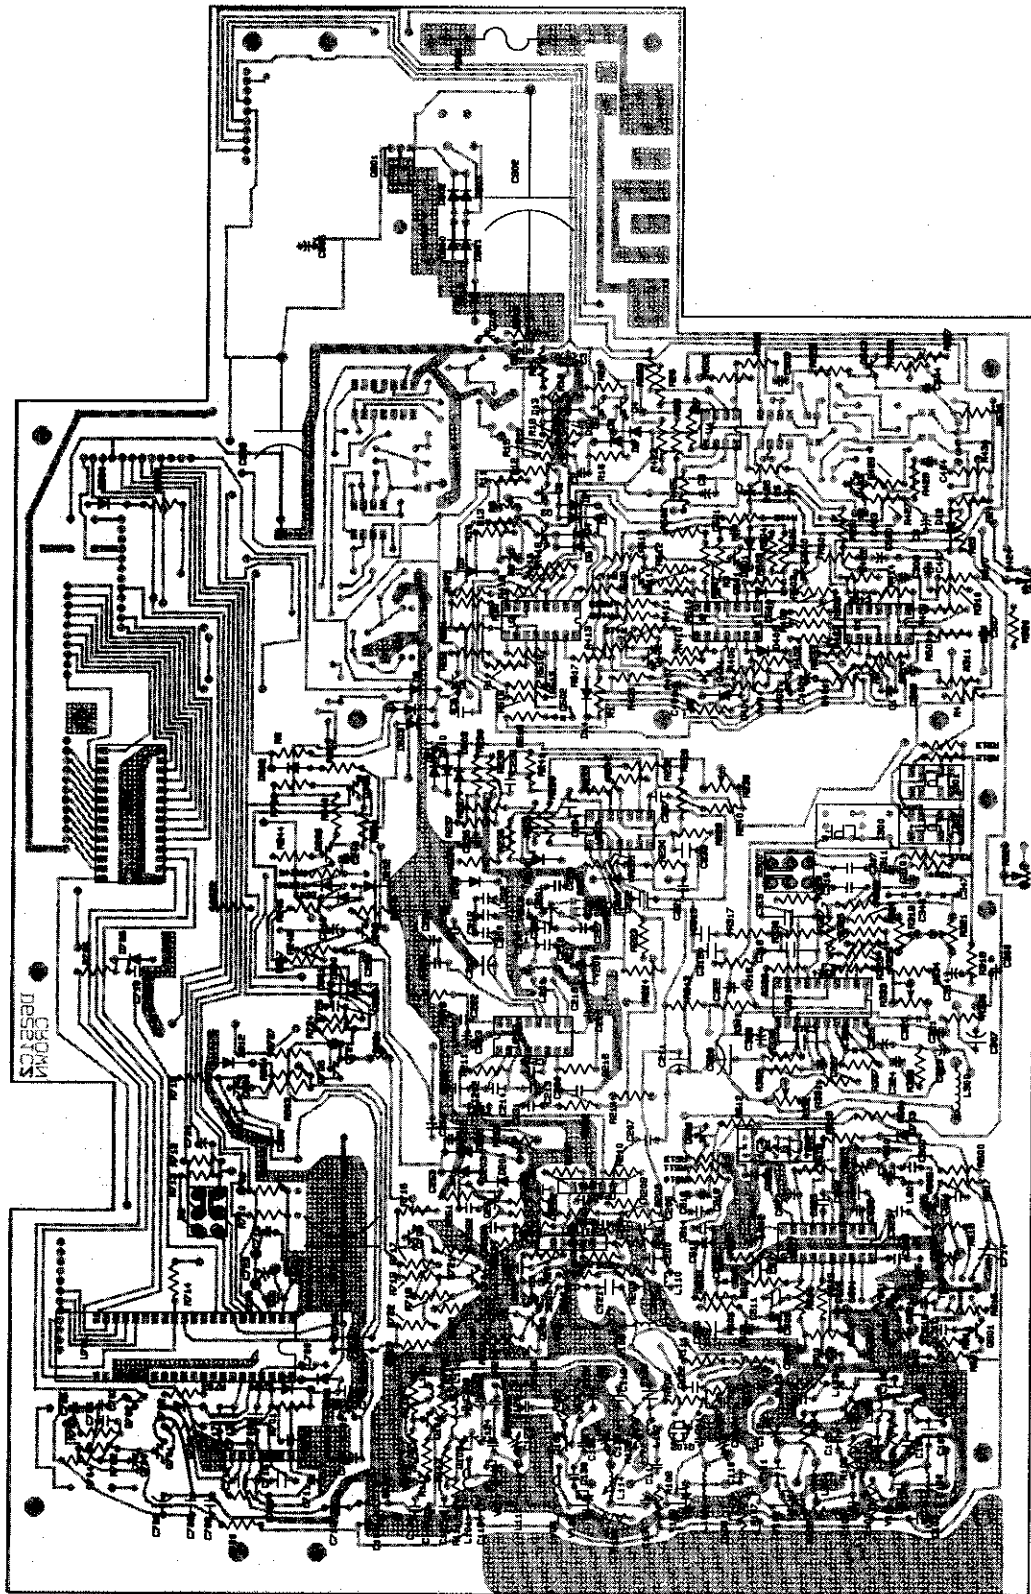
Main Module Foil Board Layout #Q42542-3
